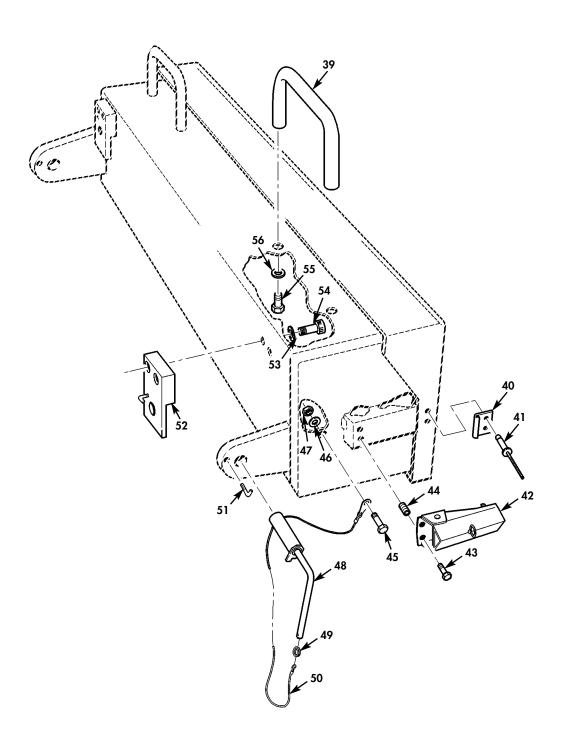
Toolboxes and Related Parts (Sheet 2 of 2).
